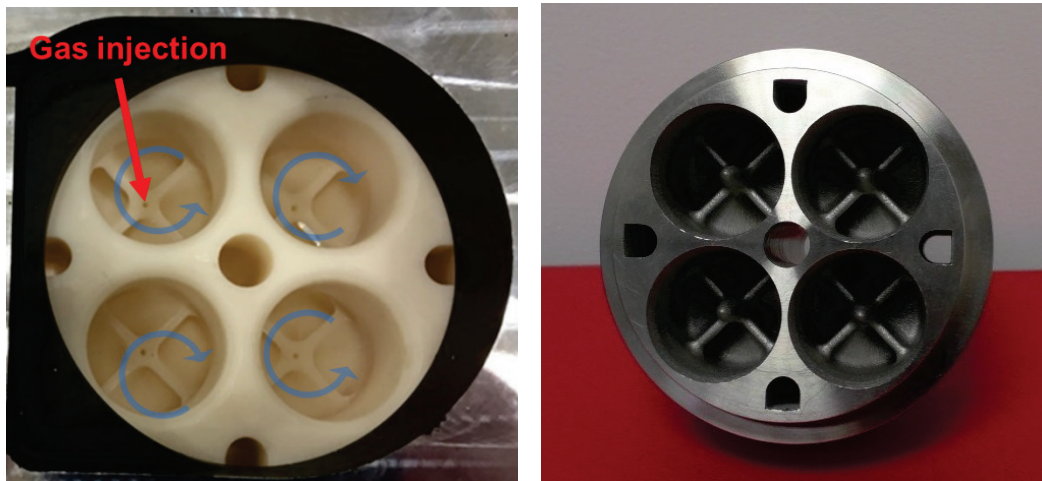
Pictures of the back of the swirl bubbler tested in the water target (left) and of the 3D printed stainless swirl bubbler tested at TTF in the mercury.
